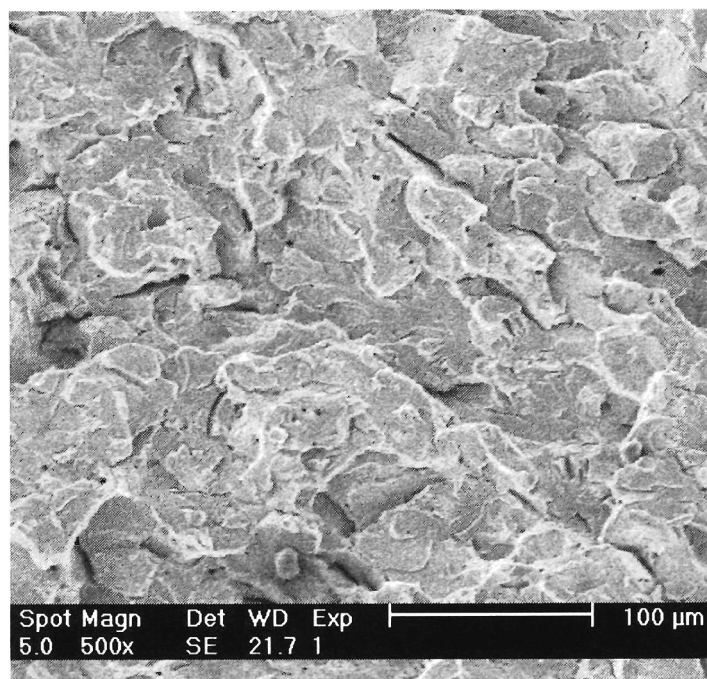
Typical Fast Fracture surface.
